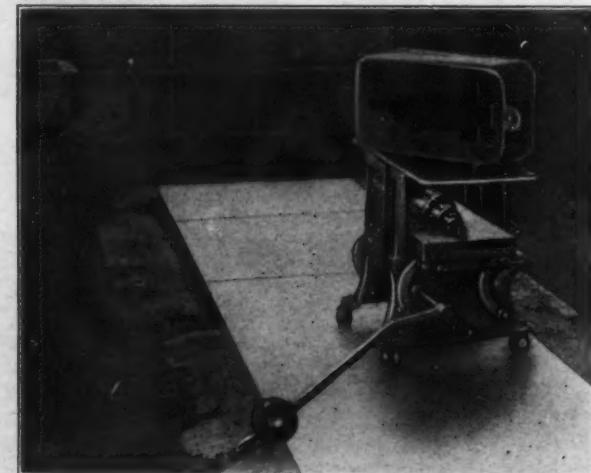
Jarring Machine Used in Connection with Pridmore Molding Machine.
